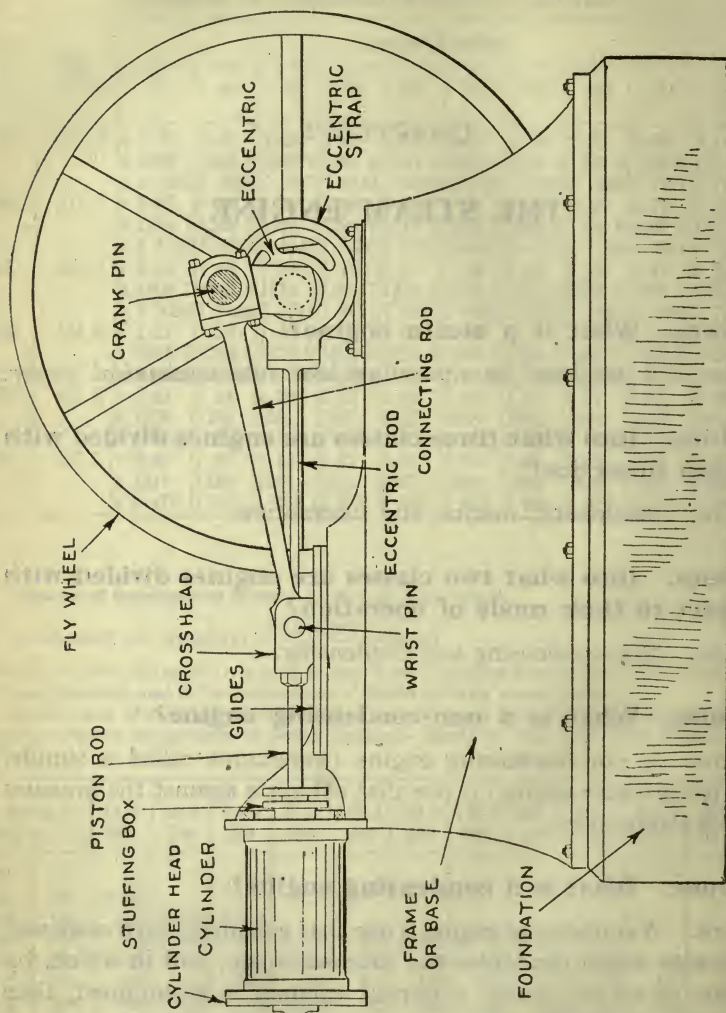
Elevation showing parts of a horizontal steam engine. *As shown*, the engine is mounted on a substantial frame or base, to which is bolted at one end, the main bearing, and at the other, the cylinder, being connected by a vertical flange projecting from the top of the frame. The figure shows the general arrangement of parts.
